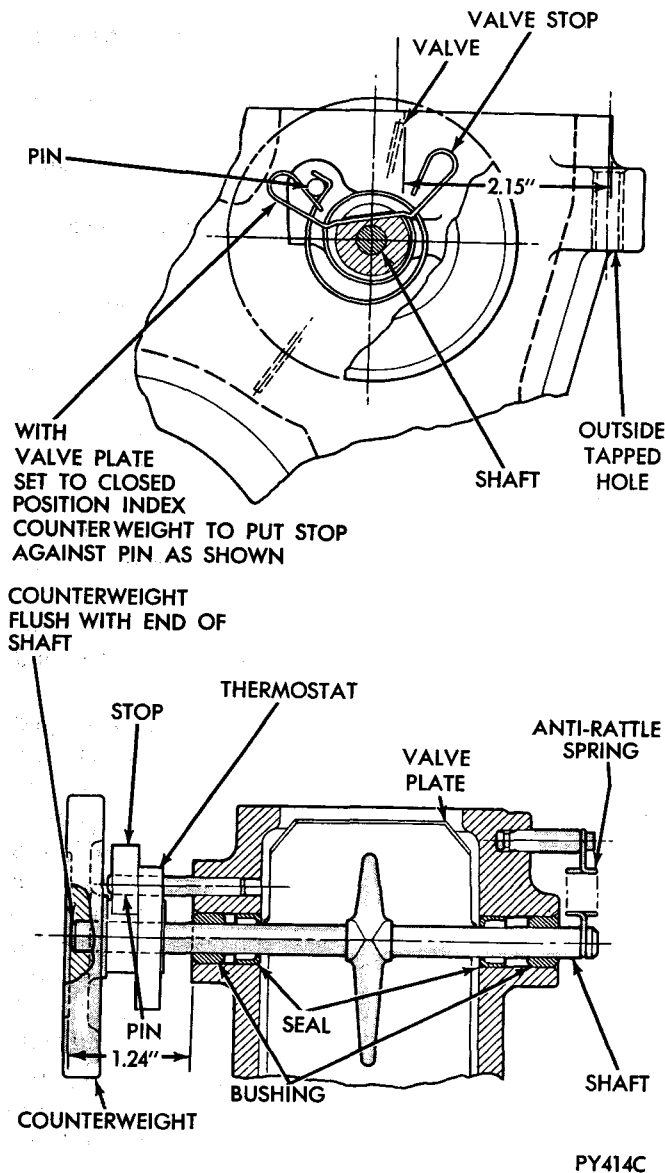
Proper Manifold Heat Control Valve Installation Six Cylinder Engines
